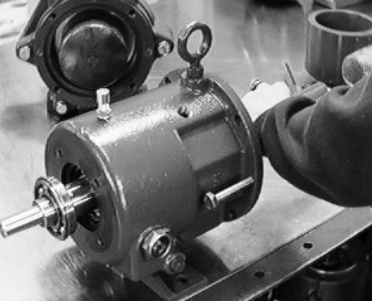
Slide Outer Drive off Shaft or OMR from Adapter Hub
